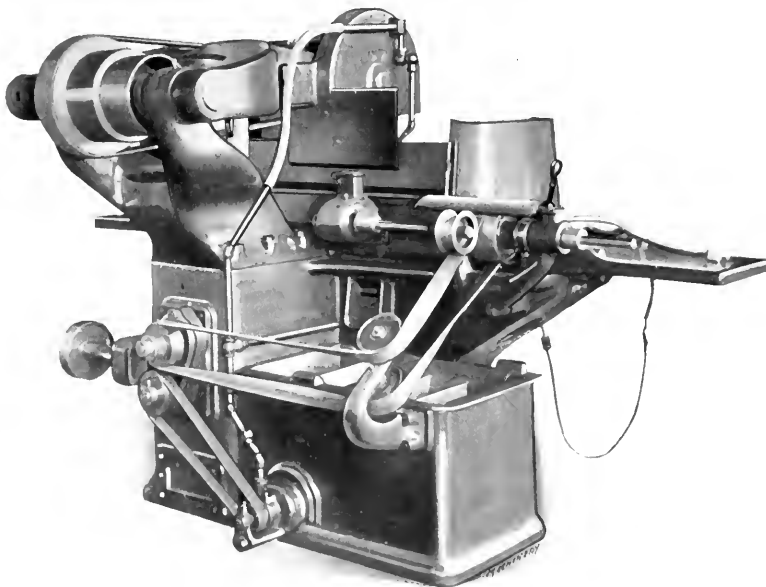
Rear View of Pratt & Whitney Disk Grinder showing Wheel Support and Arrangement of Drive
